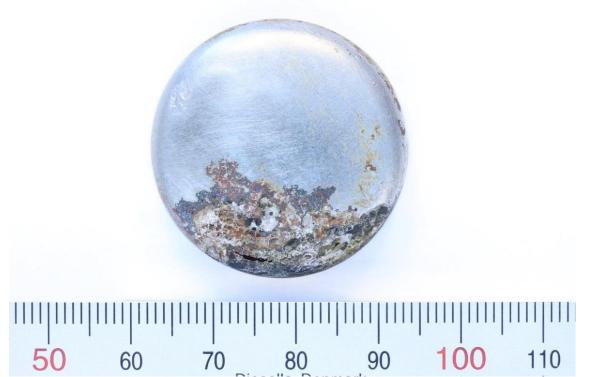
Inside - 1 small core plug from rear cylinder head after cleaning with acetone and ultrasound.
